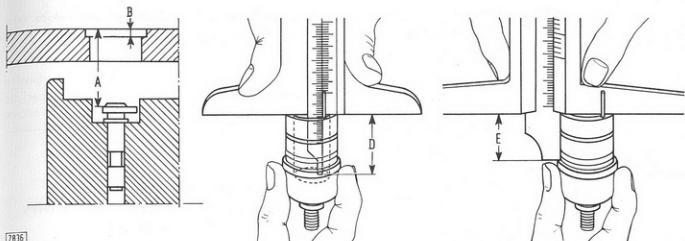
Dimensions A, B, D and E for Shut-off Spring Preload Adjustment
